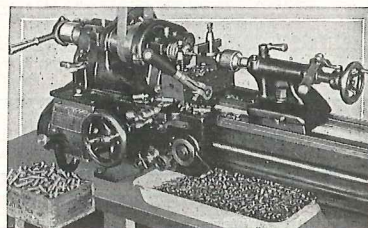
Forming and Cutting Off Duplicate Parts from Bar Stock
